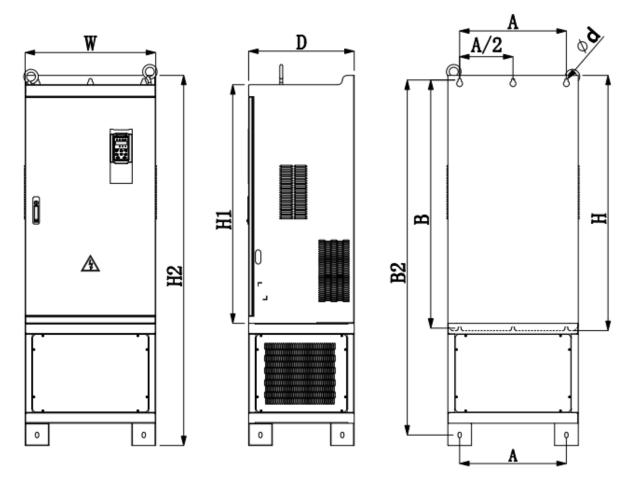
SIZE K~J(280KW-315KW) Dimension
